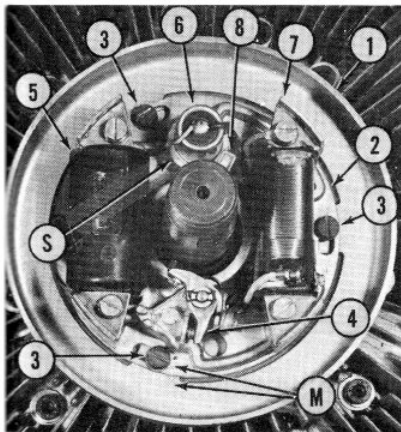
Assembled view of high tension magneto unit with flywheel removed.
